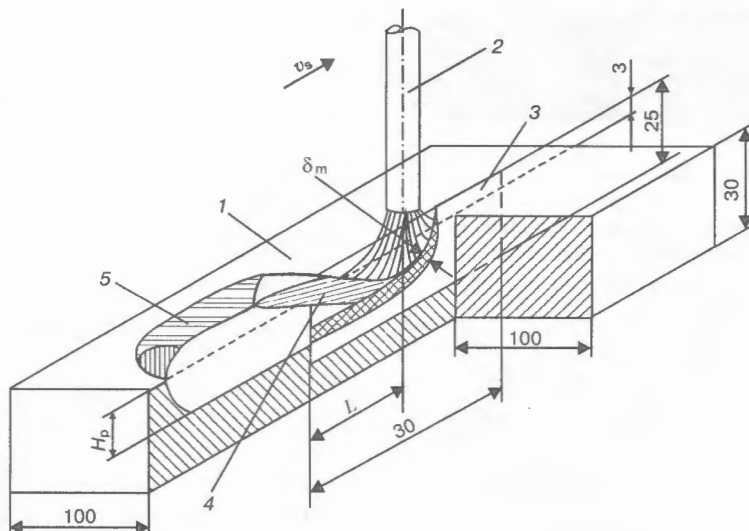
Schematic of a sample for measuring thickness of the molten metal interlayer under the arc during surfacing: 1 — base metal; 2 — electrode; 3 — refractory insert; 4 — molten pool metal; 5 — deposited metal
